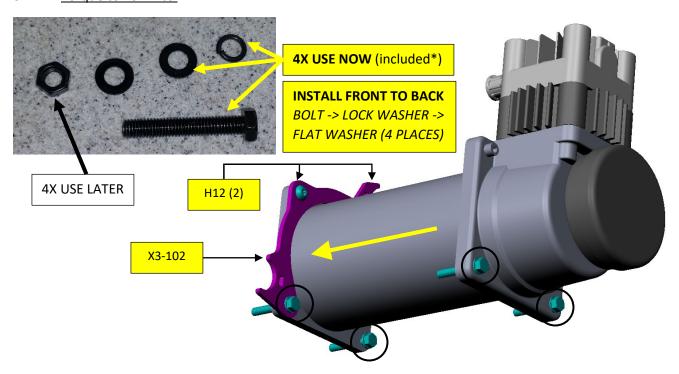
Air Compressor with Bolts and X3-102 (Shown with Air Filter and no Leader Hose)
